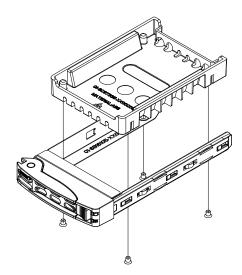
Removing a Dummy Drive from the Drive Carrier
